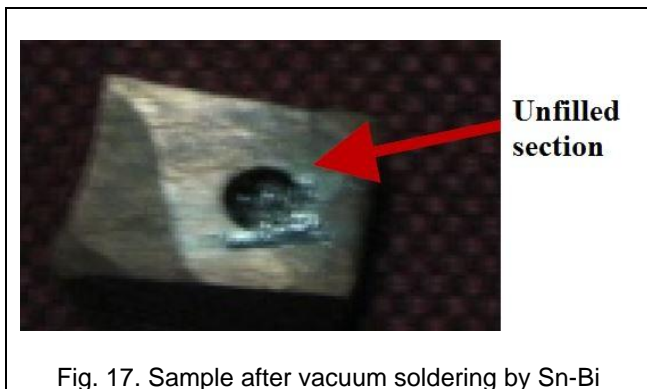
shows sample after vacuum soldering by Sn-Bi for experiment 2. Unfilled section is present due to formation of oxide layer and so low wettability. Because flux could not remove the oxide layer.
